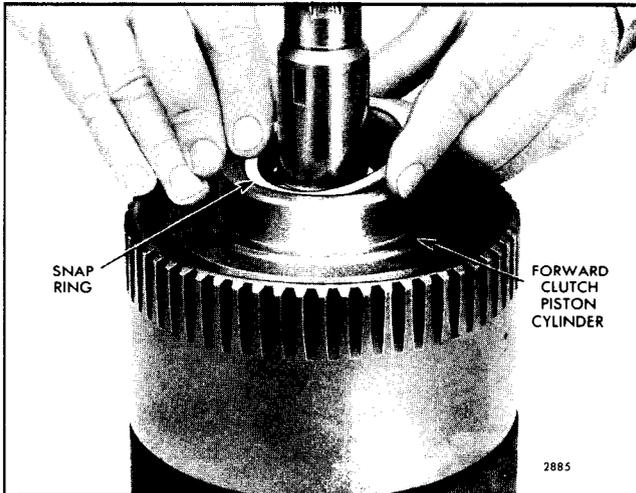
Installing Bearing Retaining Snap Ring in Forward Clutch Piston Cylinder
